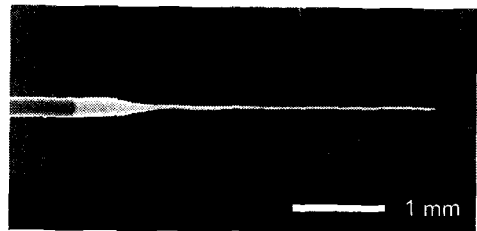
ϕ 30 μm tungsten carbide shaft fabricated using the deep immersion method⁵
